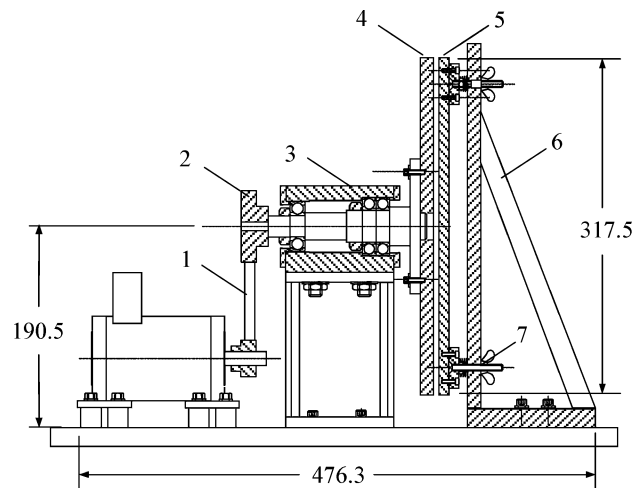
Couette flow calibration facility: 1, timing belt; 2, timing pulley; 3, bearing assembly; 4, rotating disk; 5, stationary disk; 6, supporting bracket; and 7, spring-loaded support screw (dimensions in millimeters).
